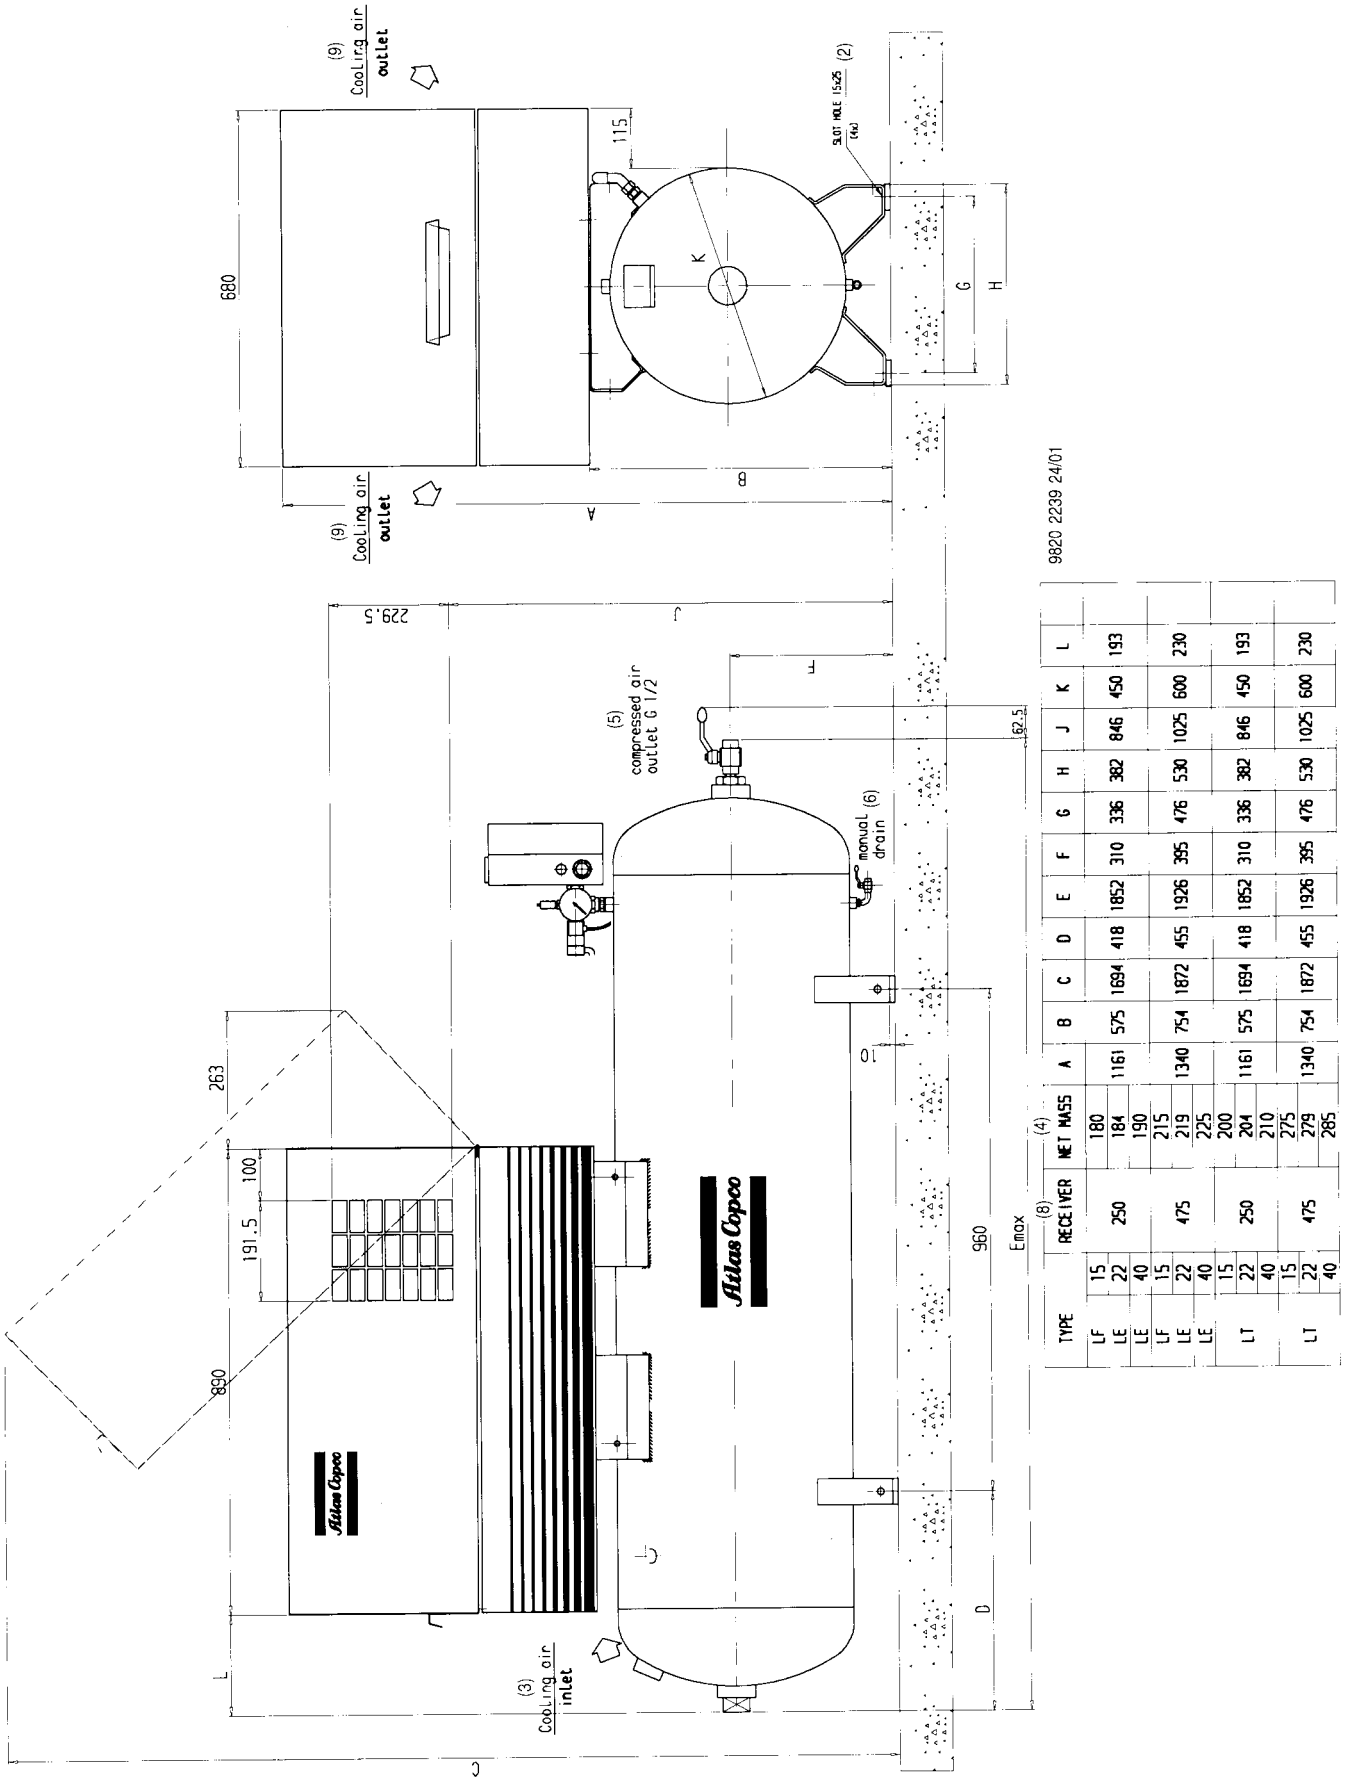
Dimension drawing, LE/LT15 up to -40 and LF15/22 Complete Unit with optional silencing hood
